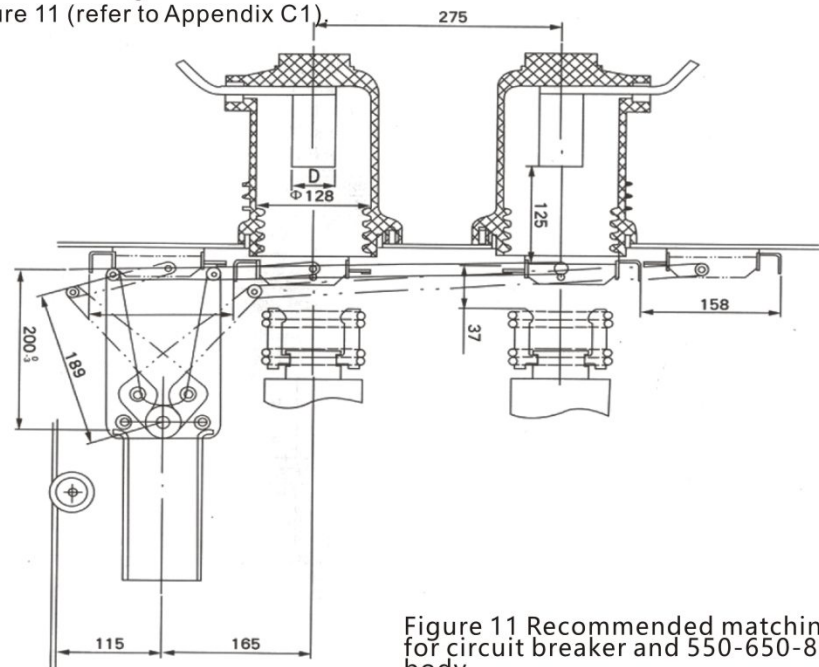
Recommended matching dimensions for circuit breaker and 550-650-800 wide cabinet body
